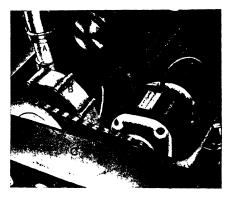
Standard Camshaft Drive for the C.A.V. Dynamo on Arrol-Johnston cars. For accessibility this arrangement cannot be improved upon. A slow-speed machine is necessary in this case, owing to the slow driving speed.
